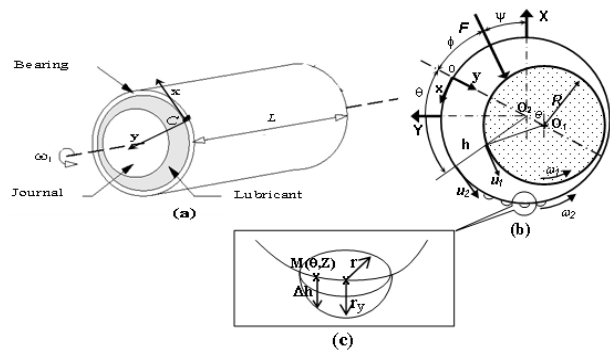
Hydrodynamic journal bearings (a) Bearing geometry, (b) Right section of the bearing, and (c) Texture geometry.
